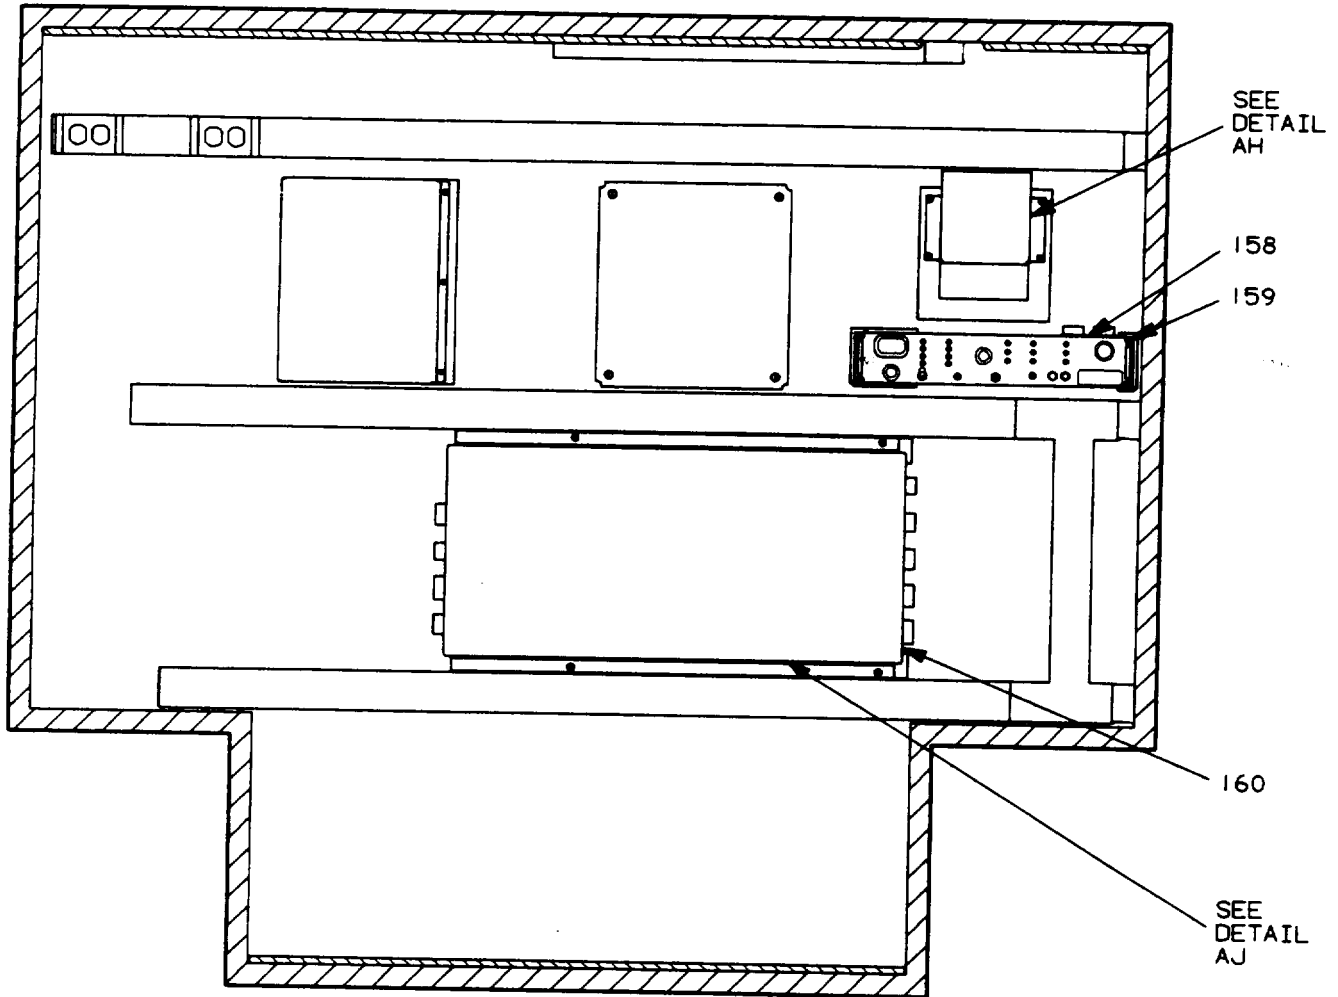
SHELTER ASSEMBLY (SHEET 12 OF 24)
